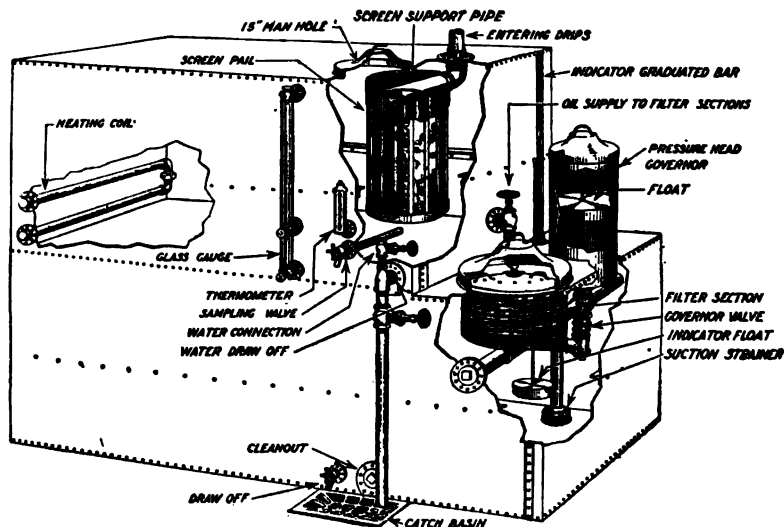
SEC. 8.—Sectional view Batch filtration system.
